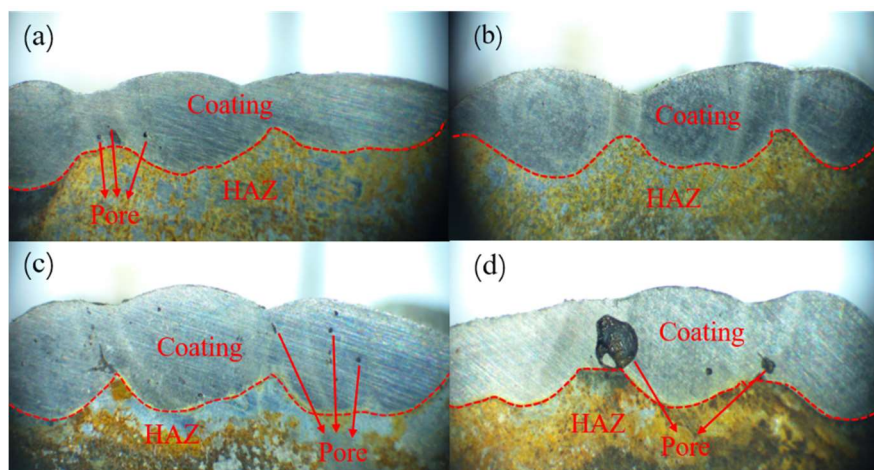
Cross section size and morphology of the cladding layer: (a) Laser cladding coating N1 (b) Laser cladding coating N2 (c) Laser Cladding Coating N3 (d) Laser Cladding Coating N4
